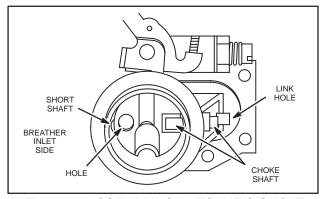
ASSEMBLING AUTOMATIC CHOKE
